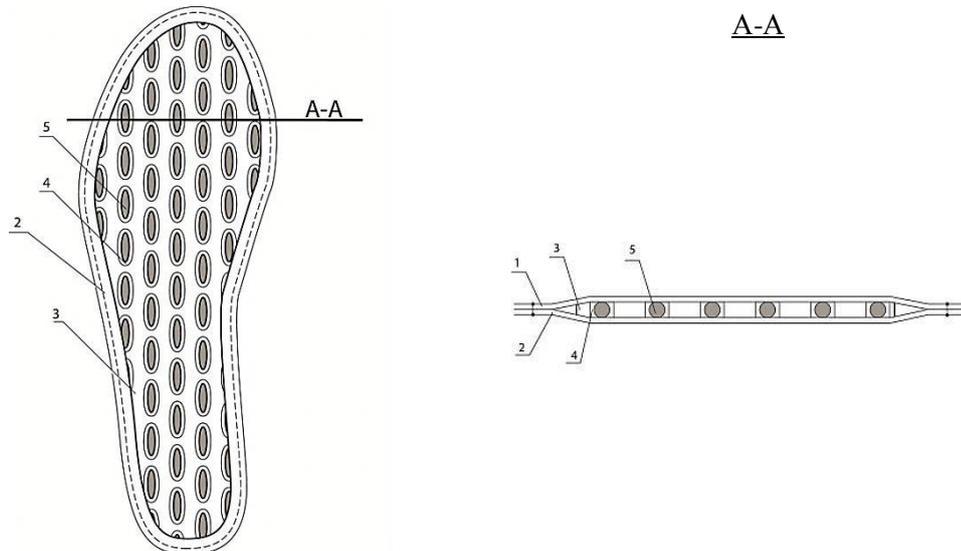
Technical drawing of special purpose insole without top layer with an additional layer with holes
